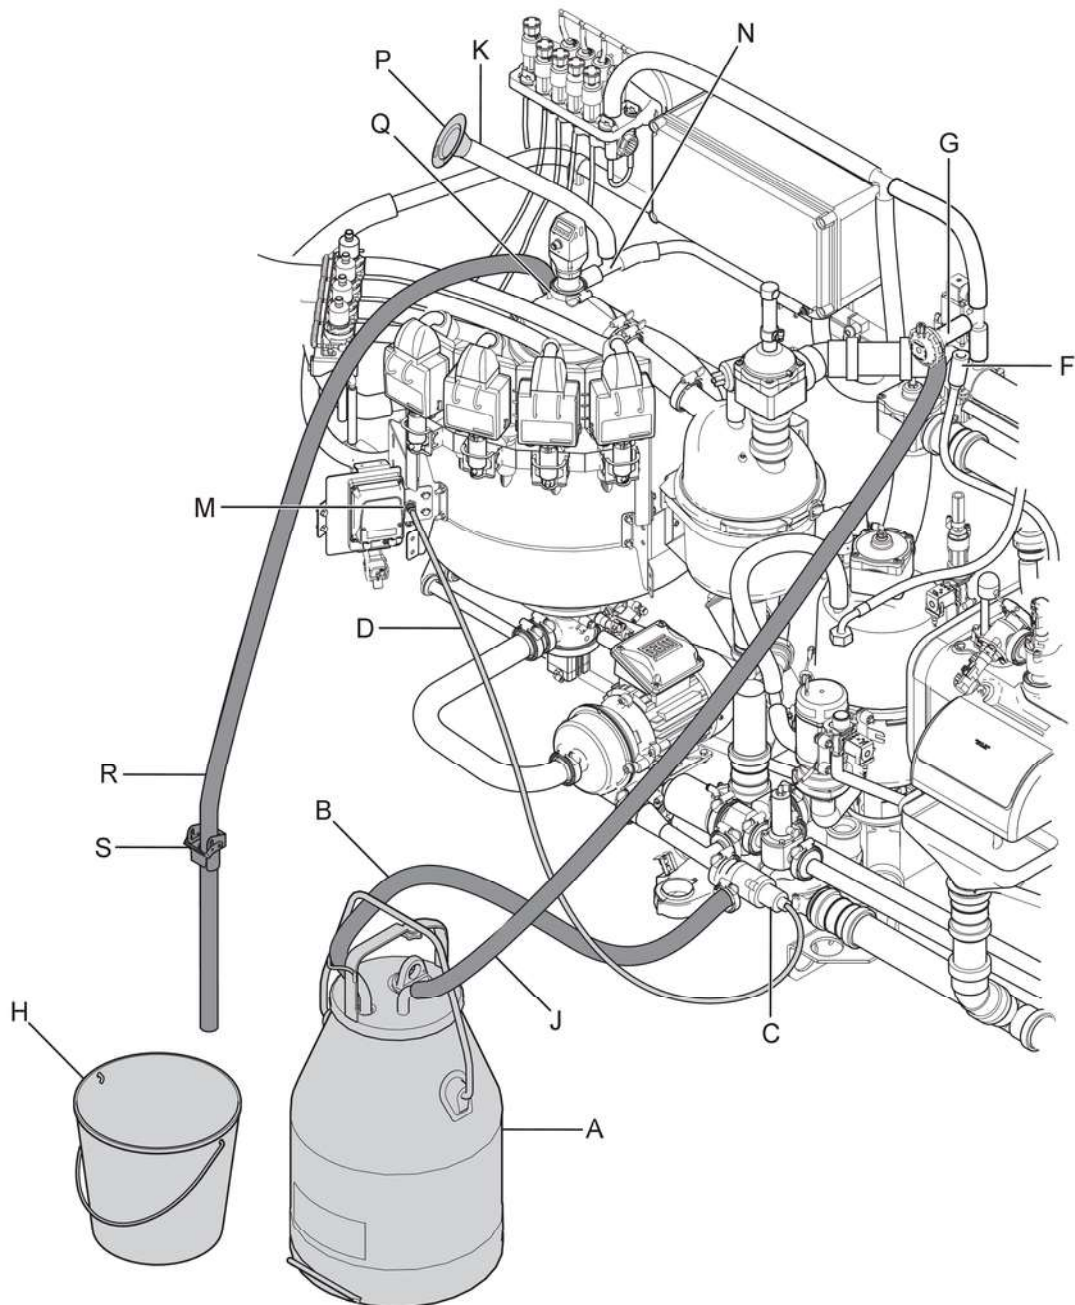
The milk meter MM27 calibration setup with the calibration valve assembly (H), vacuum and milk tubes (J, R) and a milk bucket.
